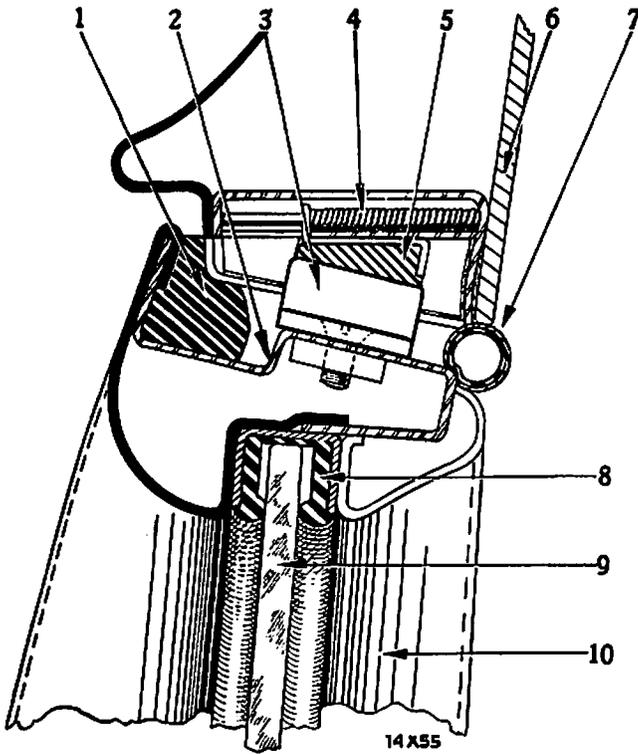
Cross Section Showing Installation of Door Header Dovetail—Upper
